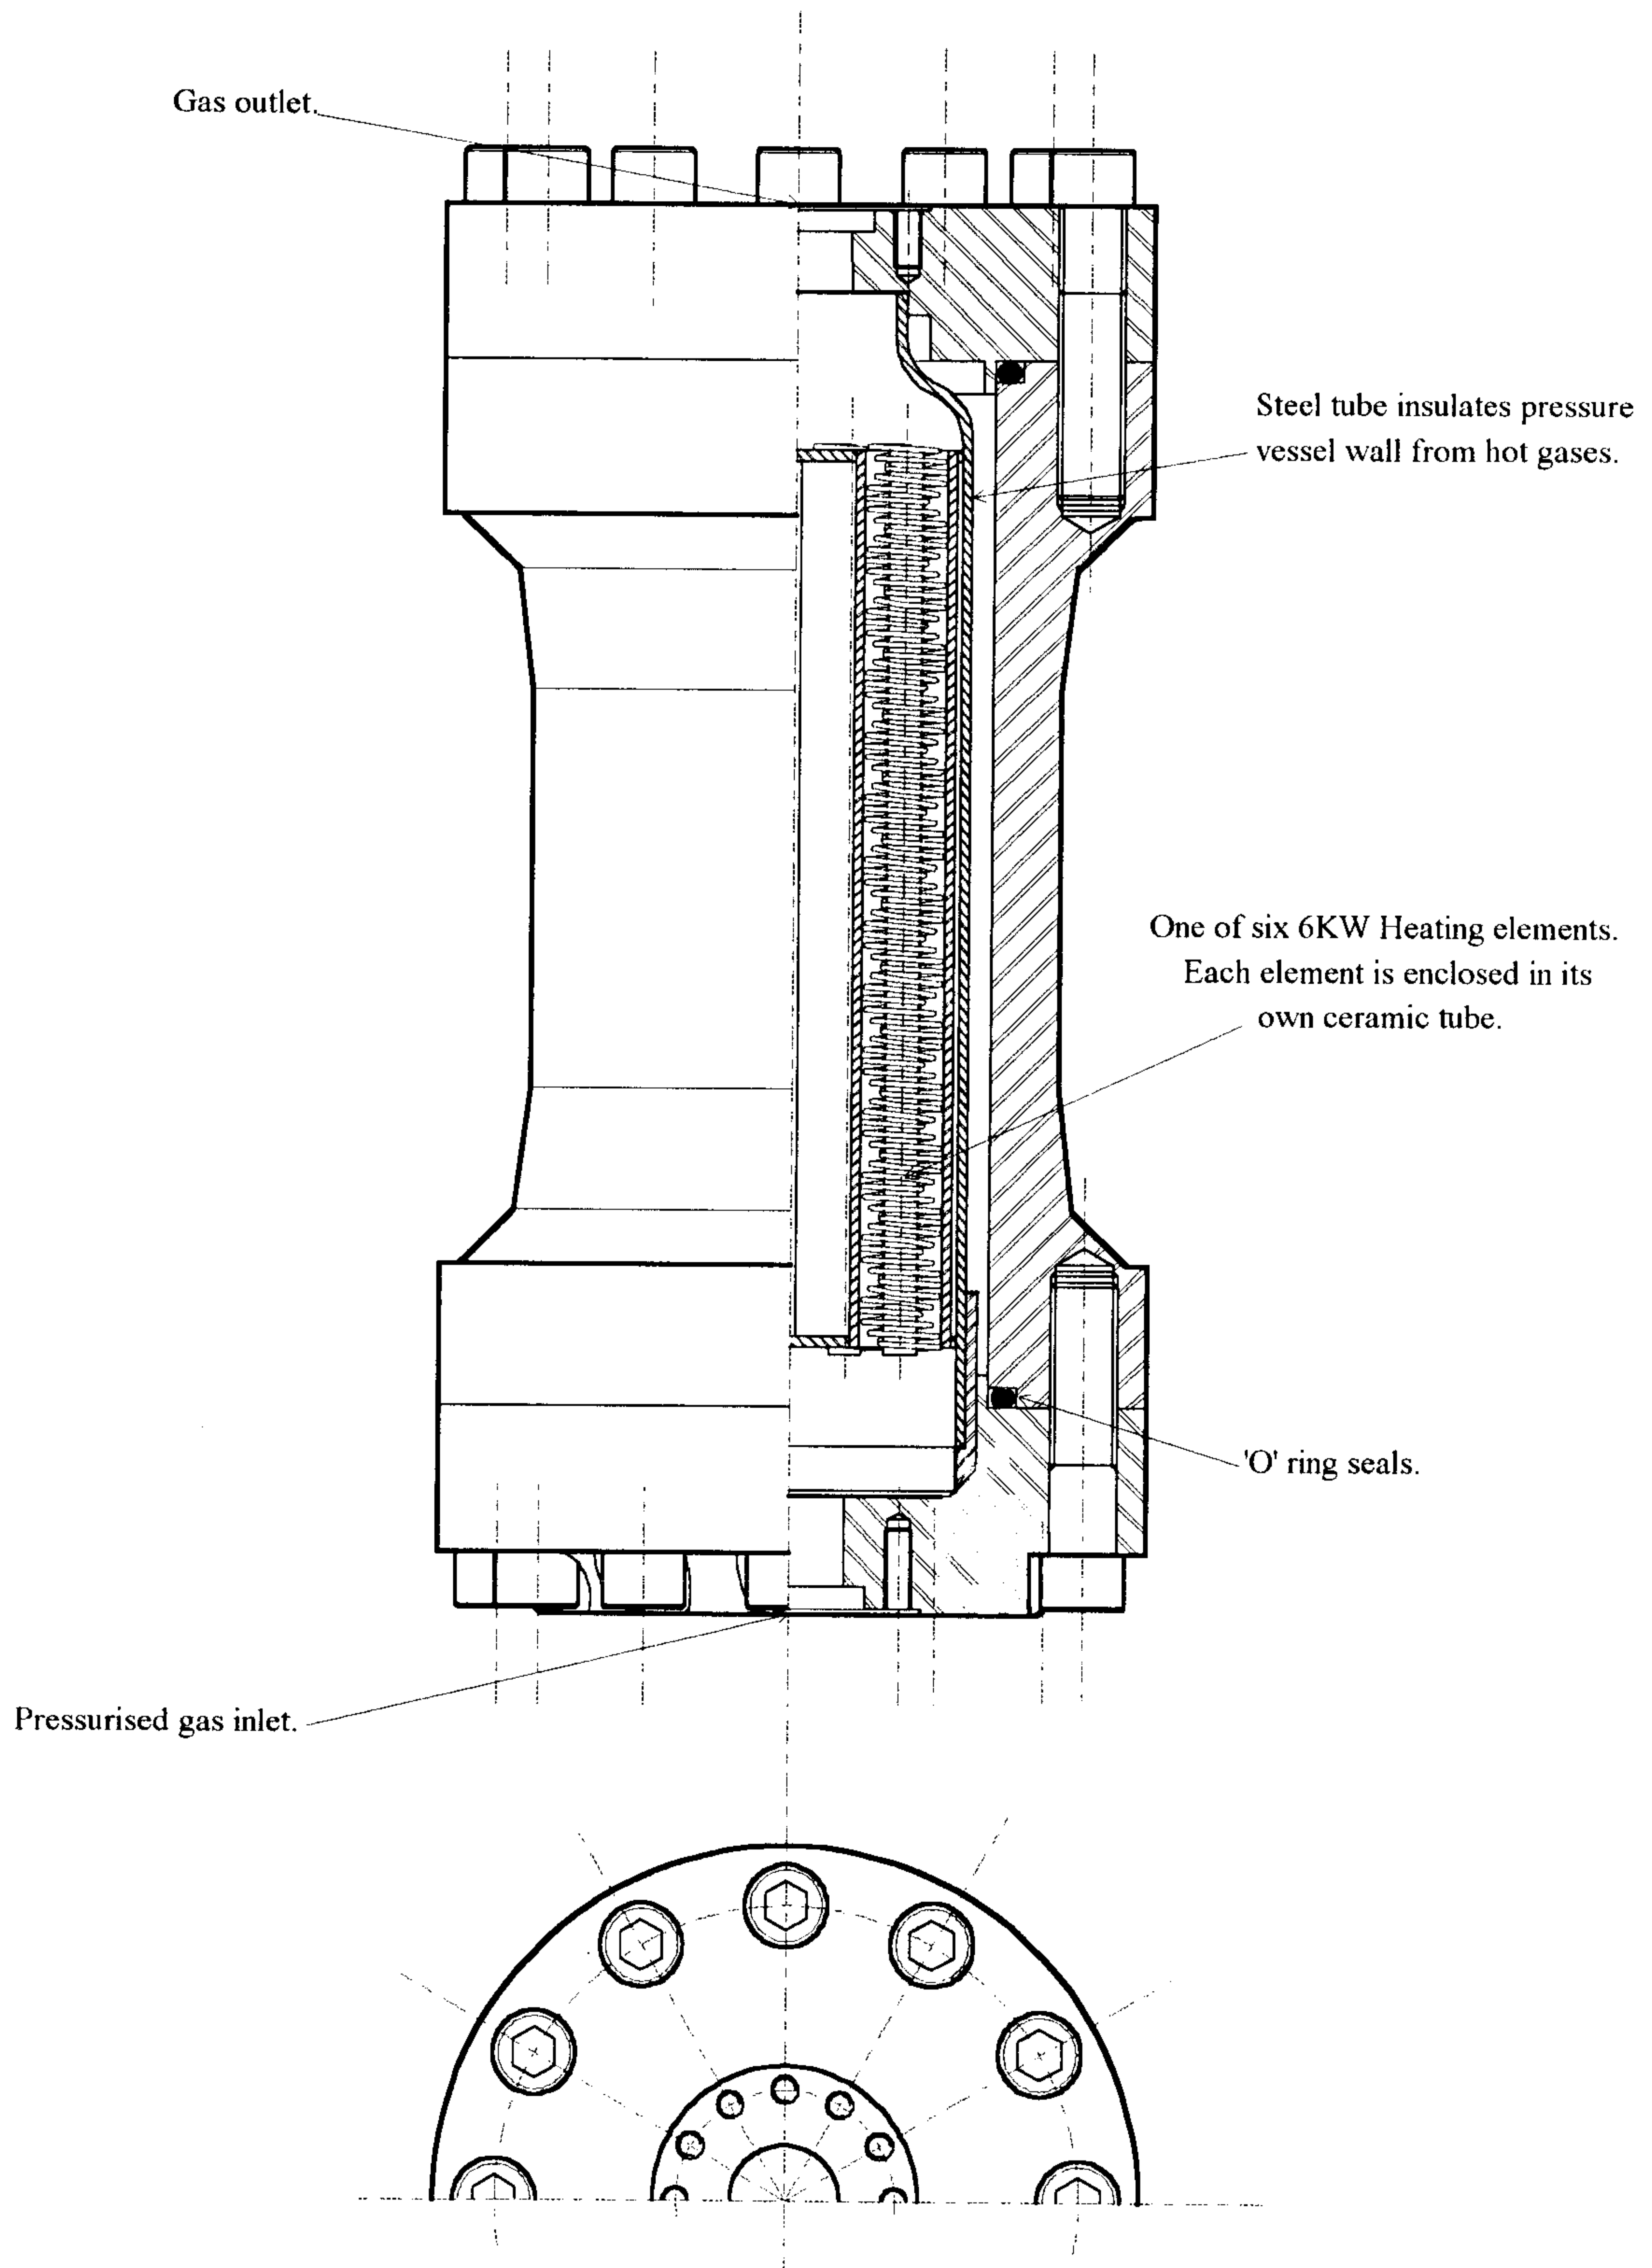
Cross section of heater pressure vessel showing 'Sylvania' heater inside.
